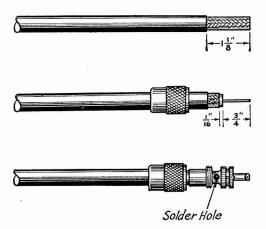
Dimensions for stripping ½-inch cable to fit Amphenol Type 83-1SP (PL-259) plug.
